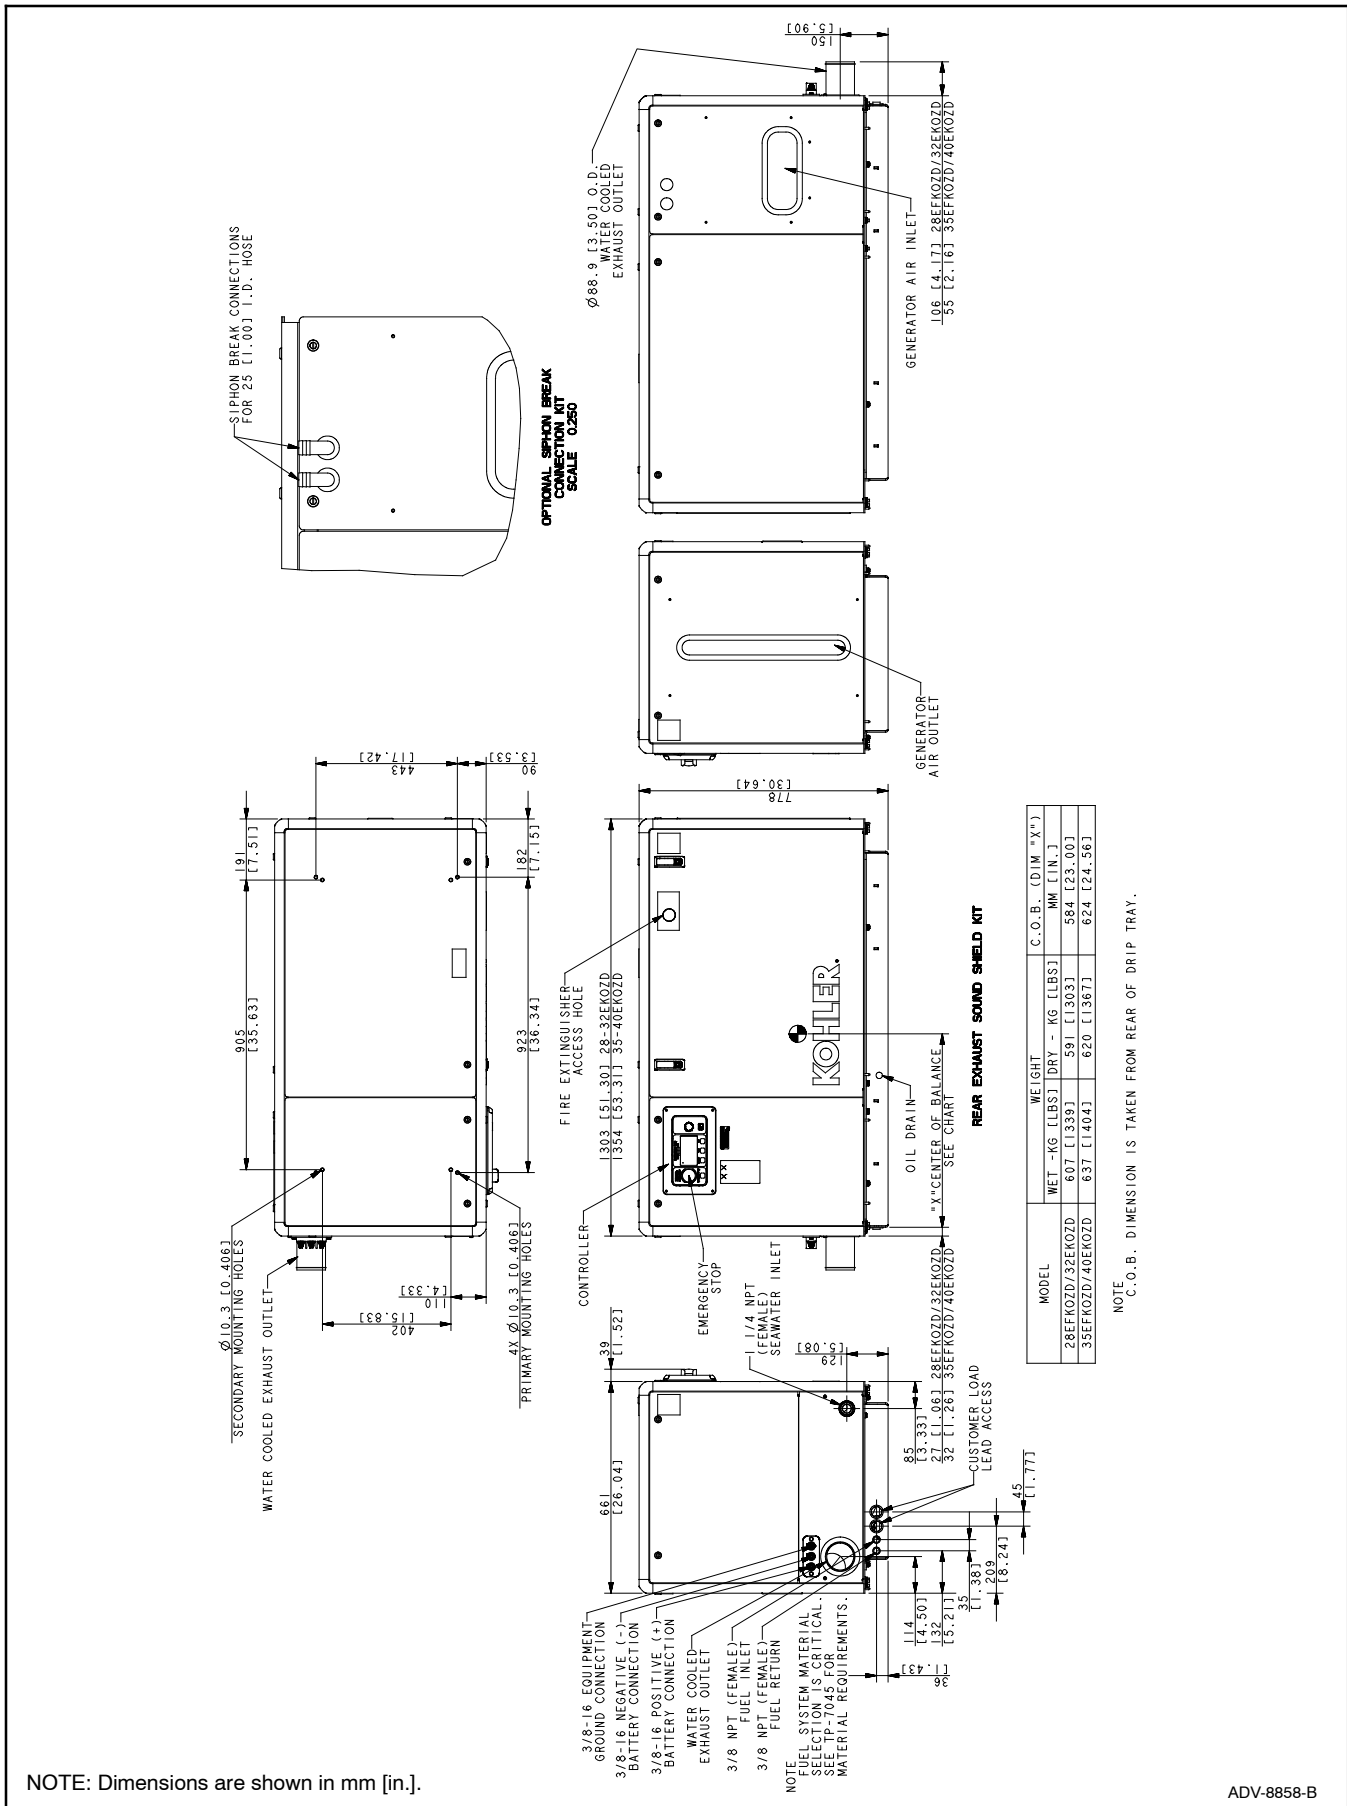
Dimension Drawing—Sound Shield, 32/40EKOZD and 28/35EFKOZD (Sheet 1 of 2)
